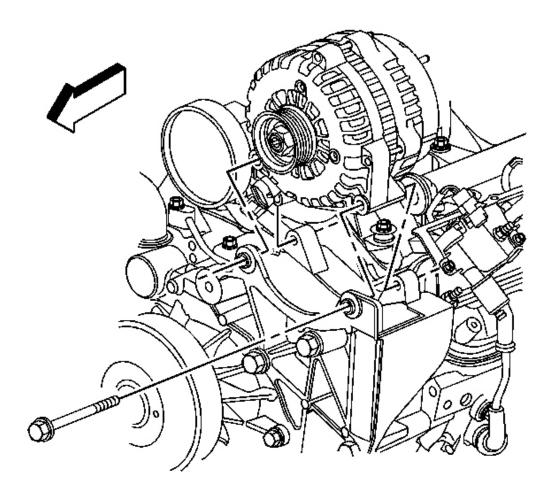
View Of Generator & Bolts (5.3L) Courtesy of GENERAL MOTORS CORP.
